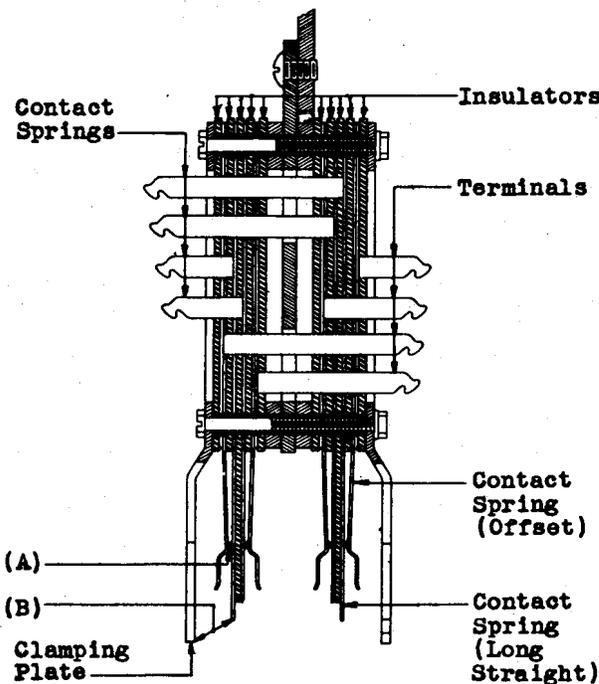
Illustrating Cross-Section of 444 Type Jacks
